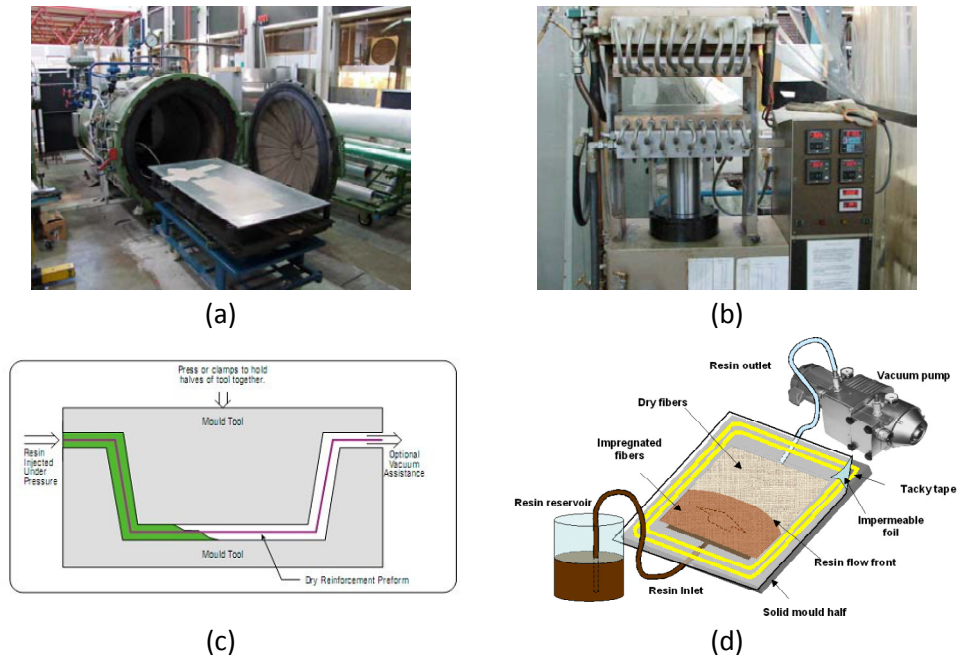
(a) Autoclave; (b) Flat hot plate press for PCM process; (c) RTM mold; (d) VIP set-up.
